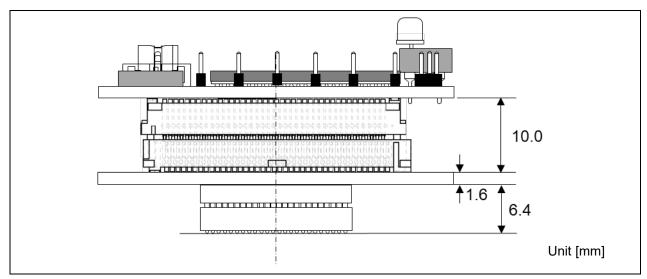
Drawing of the Assembly for the RTE77025x0CBG373T000J (373 Pins)
